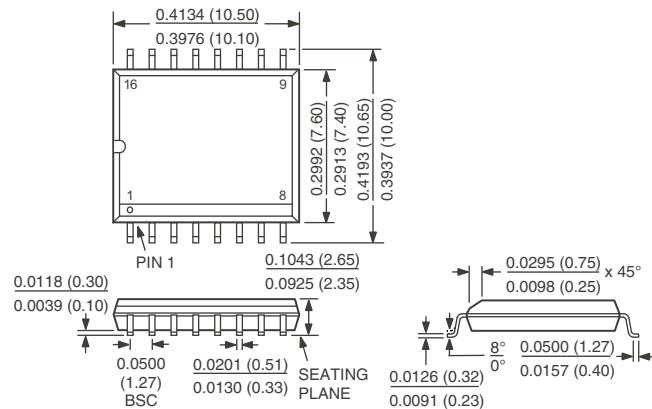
16-Lead Short Outline Package [SOIC] Wide Body (RW-16)—Dimensions shown in millimeters
